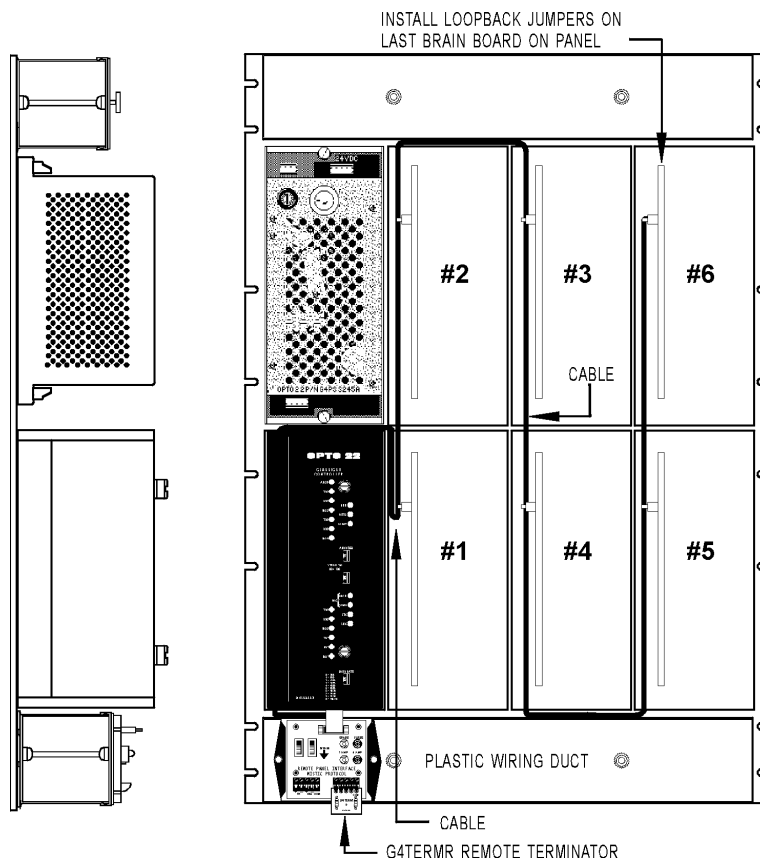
G4LC32SX Remote Bus Wiring - Single Panel
